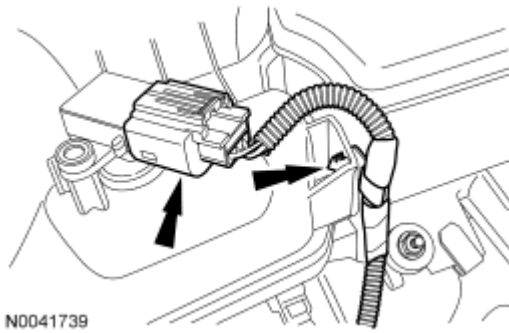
Locating Manifold Actual Pressure Sensor Electrical Connector And Pin-Type Retainer
